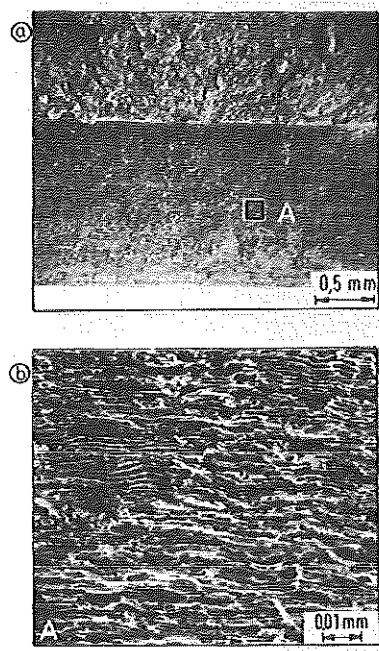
Fatigue striations on crack fracture surface: (a) specimen no. 4; (b) enlargement of (a)
